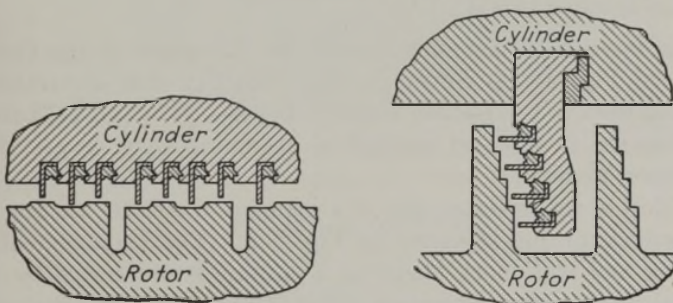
Labyrinth seals as used in balancing piston and glands.
